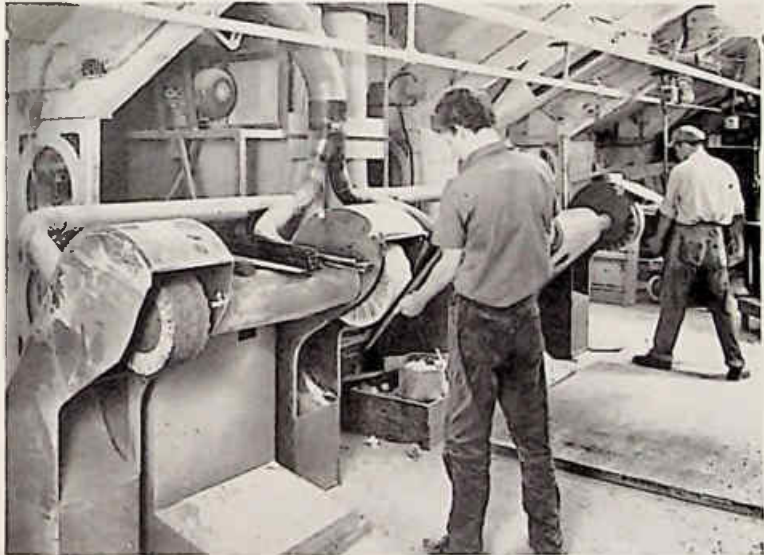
/4. Final burnishing (after belt sanding) with mops rotating at 1,500 rpm.
